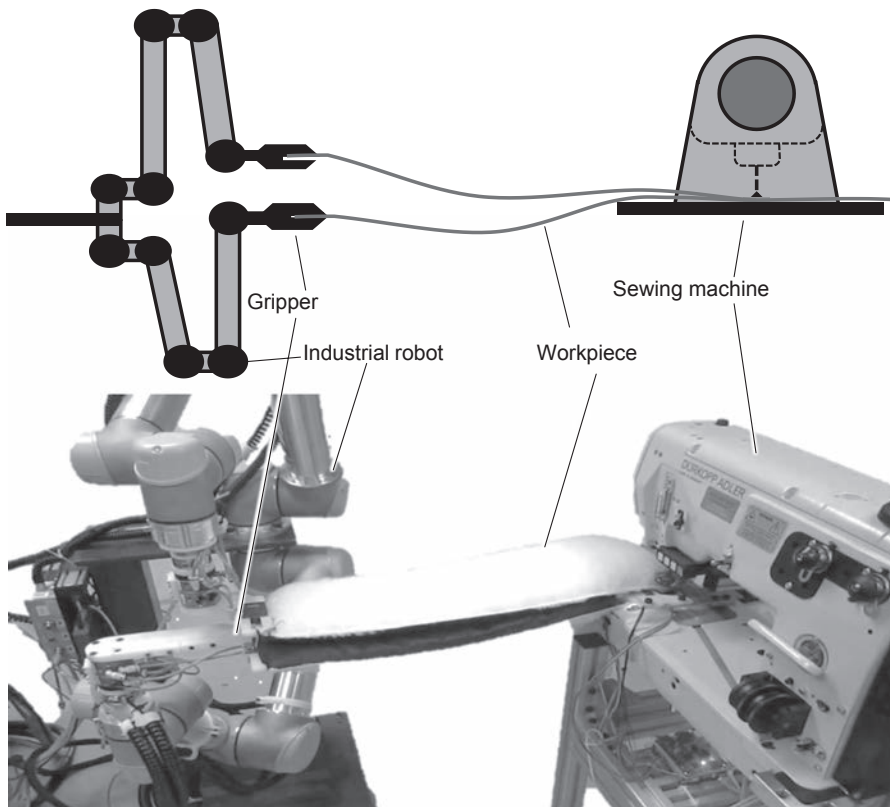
Sewing cell with industrial robots for workpiece feeding (Schrimpf et al., 2013).
